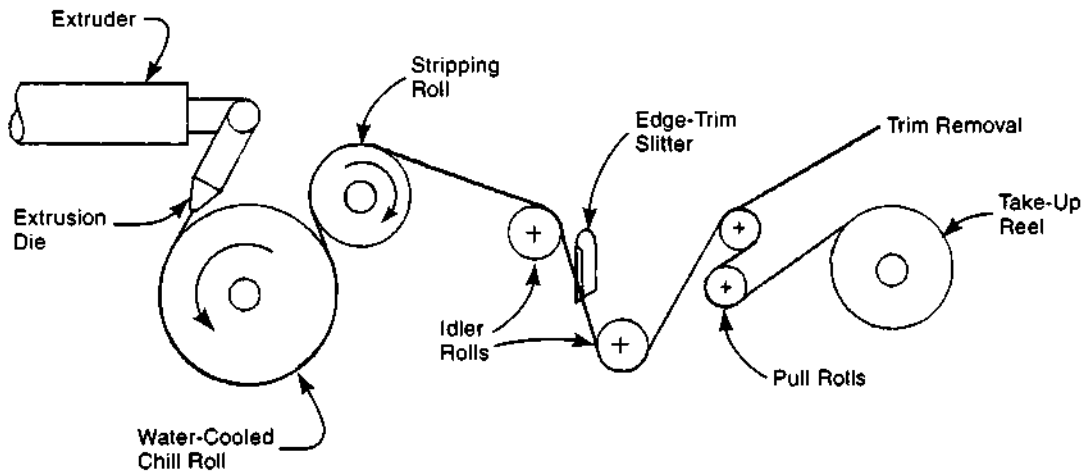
Cost film extrusion shown schematically. The highly polished and plated chill roll imparts a smooth, glossy finish to the film.
